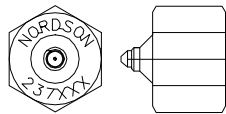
Single-orifice nozzle with insert, optional engagement
